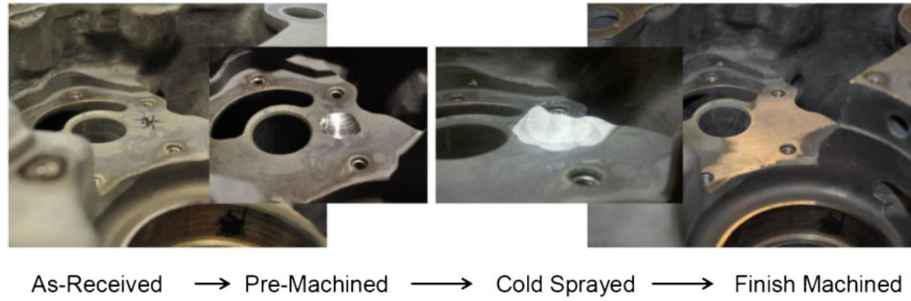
Magnesium gearbox repaired by portable cold spray [16]
